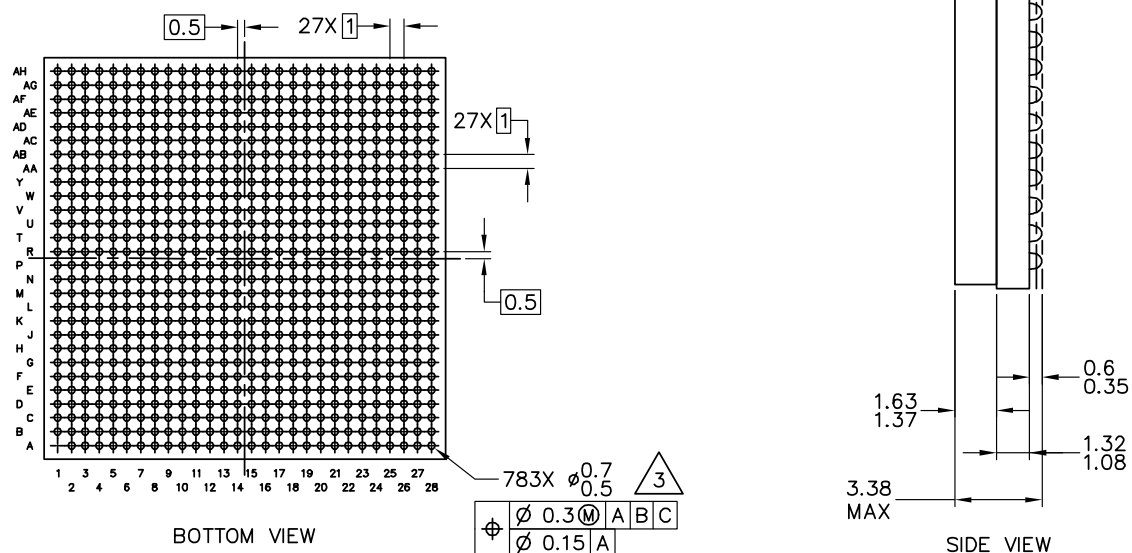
Mechanical Dimensions and Bottom Surface Nomenclature of the HiCTE FC-CBGA and FC-PBGA with Full Lid
